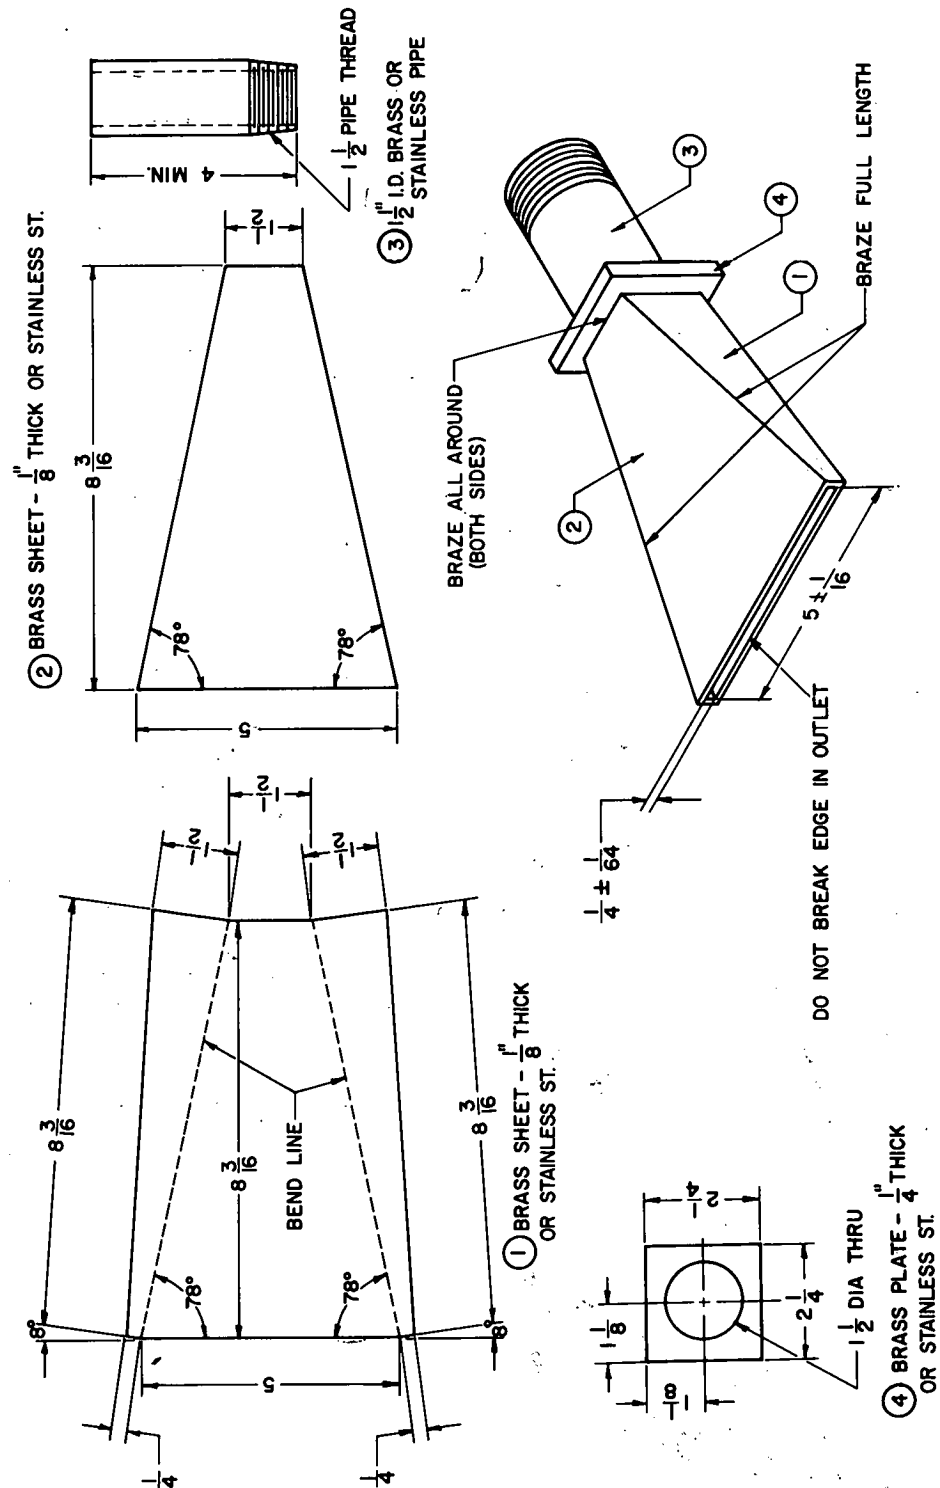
Dimensional drawing of the proposed watering nozzle.
